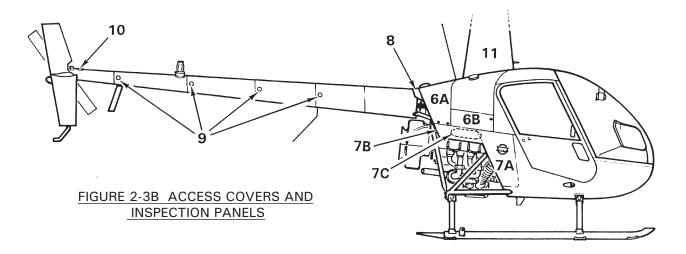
A ACCESS COVERS AND INSPECTION PANELS
